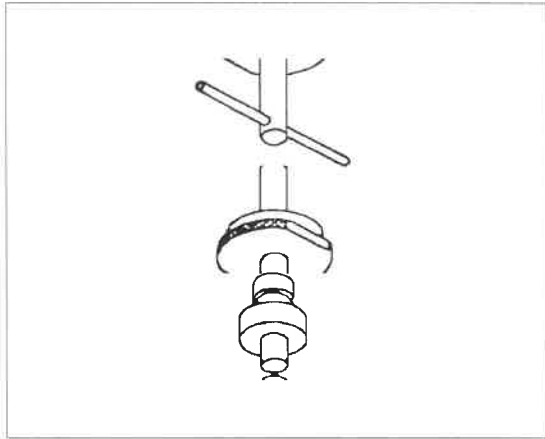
Grinding tools for seat and liner for fuel injection valve.
